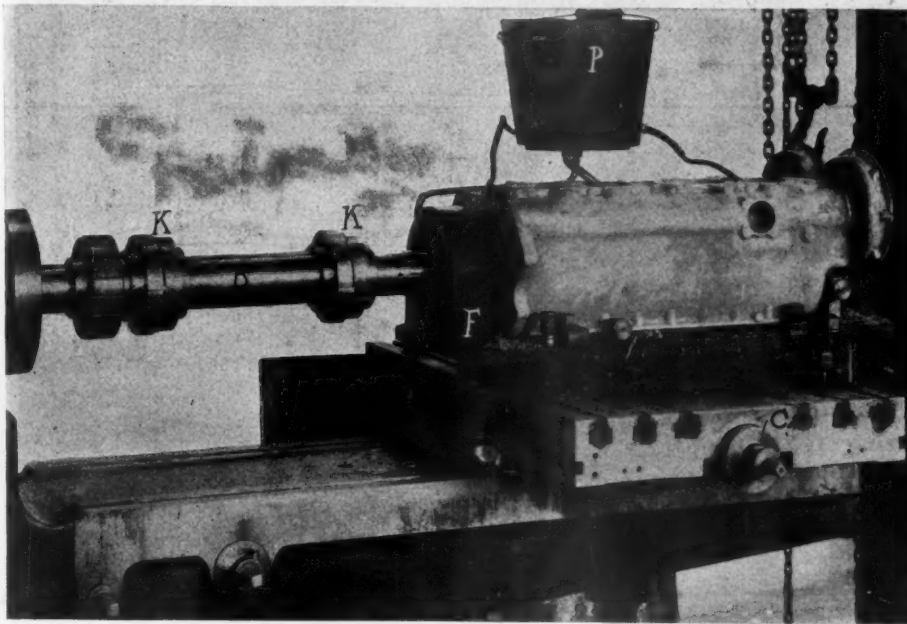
BORING THE MAIN BEARINGS OF A CRANKCASE
